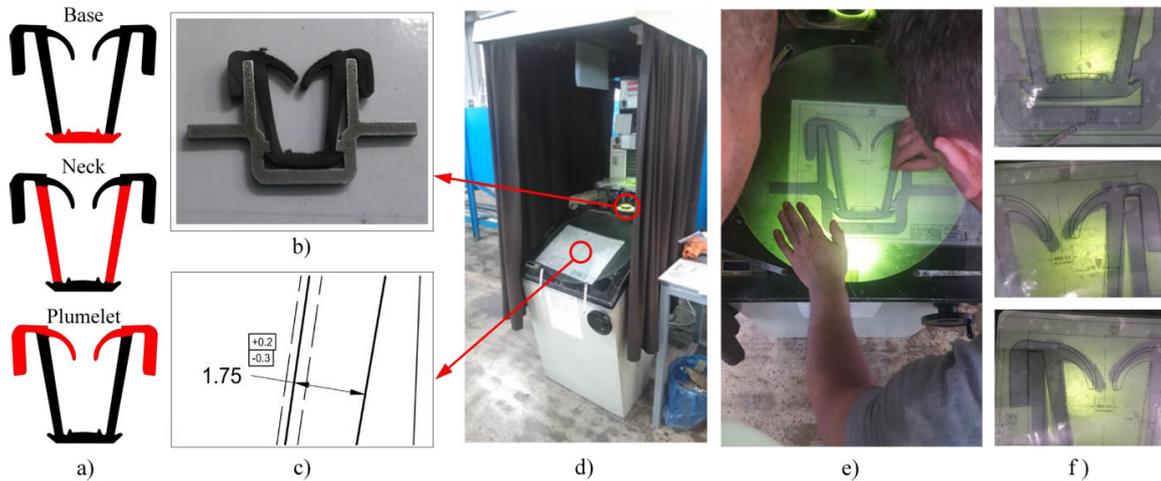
Dimensional inspection of extruded rubber profiles. (a) Composing parts of the considered profile. (b) Rubber profile mounted on the metal carrier. (c) Part of the technical drawing with focus on tolerances that need to be inspected. (d) Profile projector. (e) Manual inspection using the profile projector. (f) Inspection of specific parts by re-positioning the technical drawing over the projected silhouette of inspected profile.
